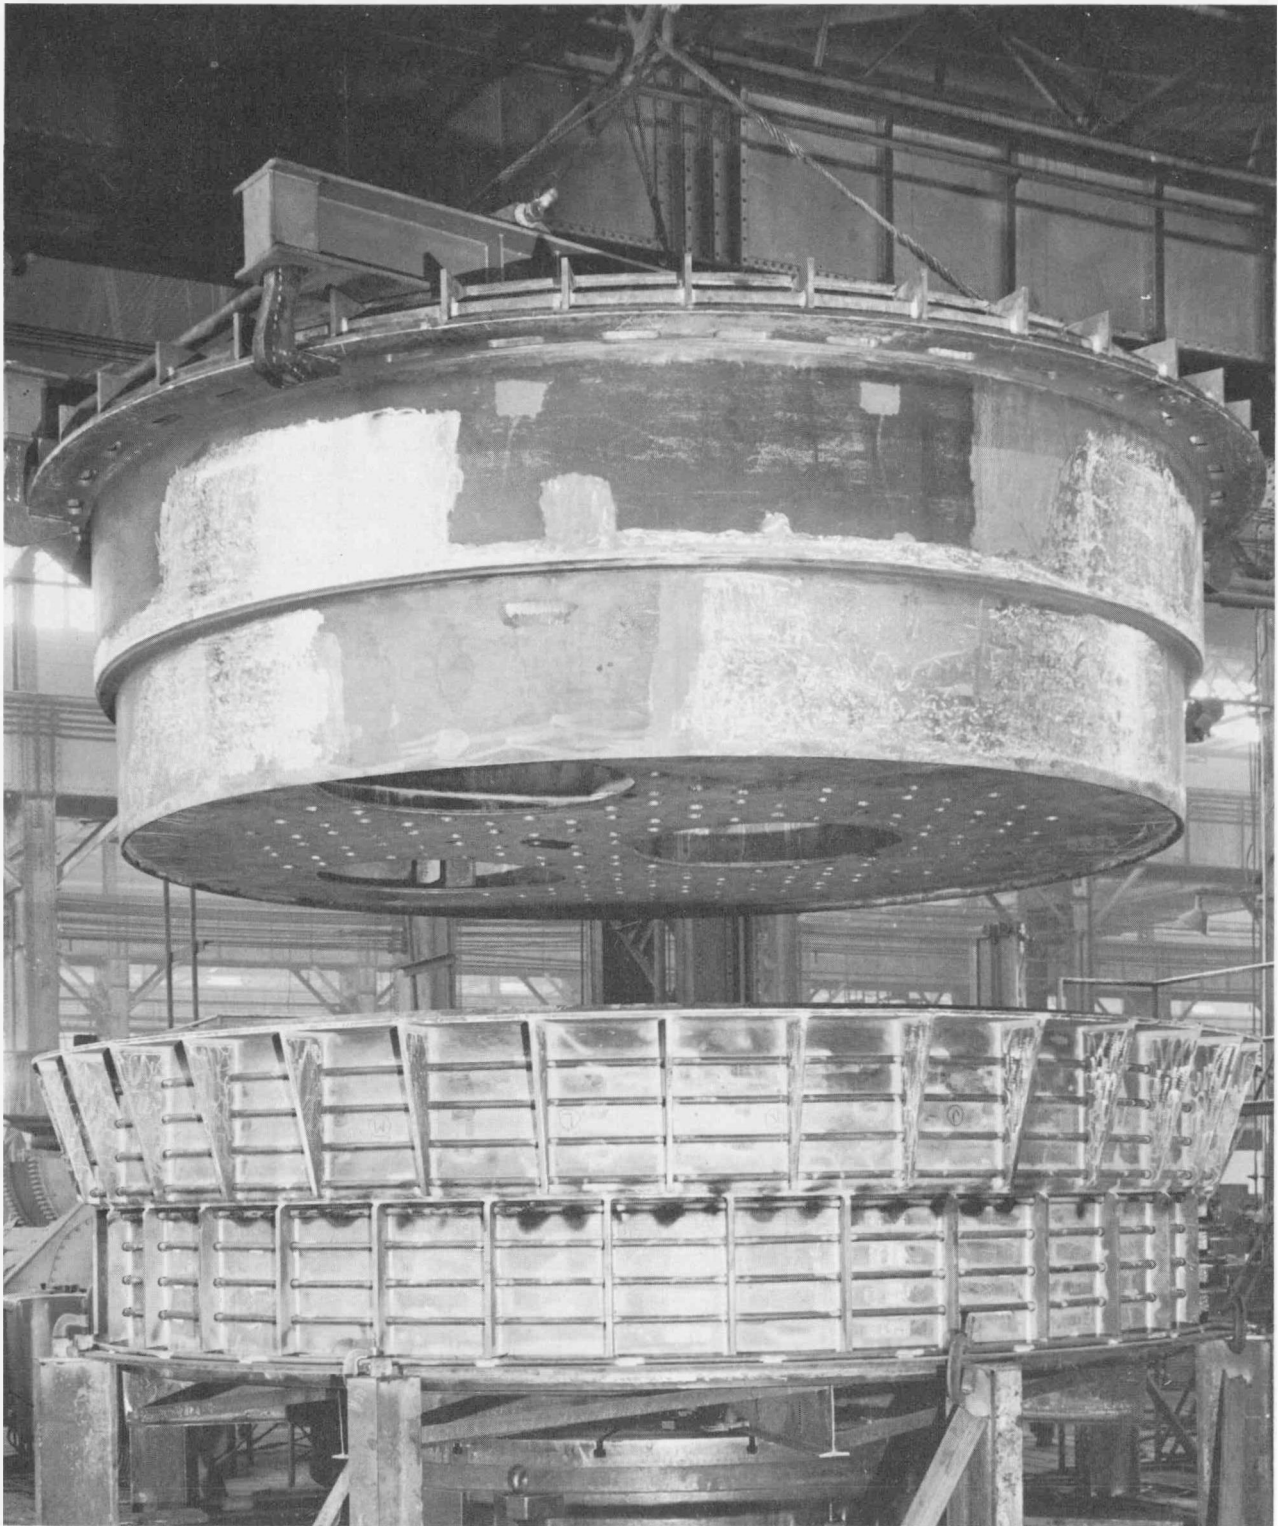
Upper Cavity Liner (Type 405 SS shown with the loading face shield shell being lowered in place to check the fit)
